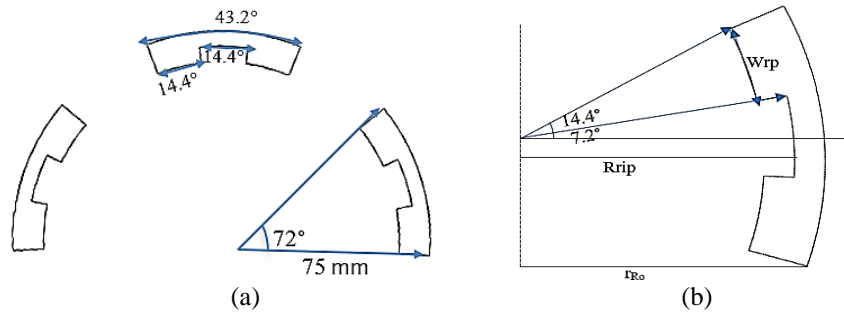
Modular rotor design: (a) sectional view of rotor structure and (b) enlarged modular rotor structure
